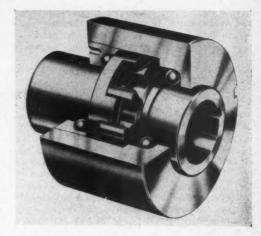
A cut-away view of the Renold RL (reversible locking) clutch
